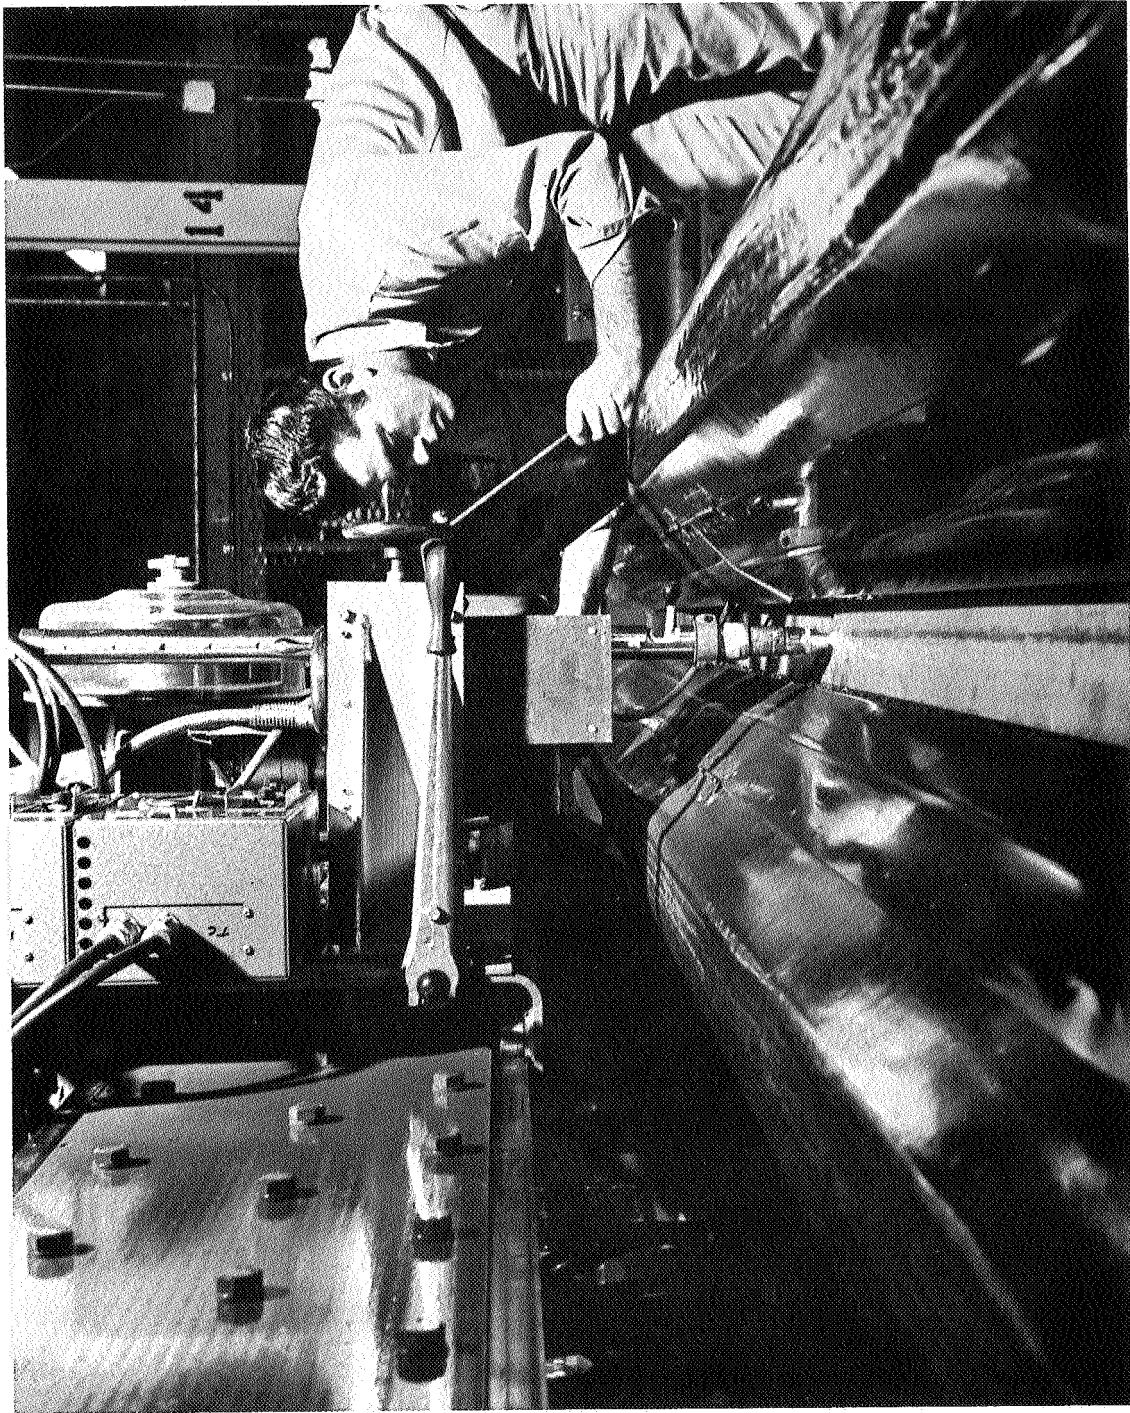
AUTOMATIC GTA WELDING OF STAINLESS STEEL SHEET
